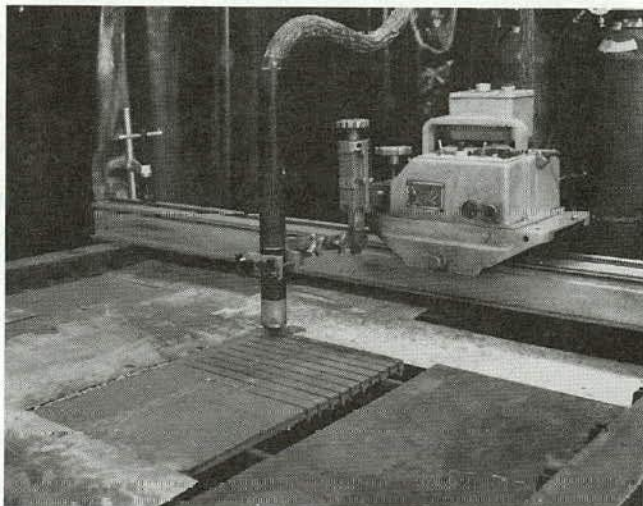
Mechanized plasma cutting system and plate cutting technique used for cutting parameter development.
